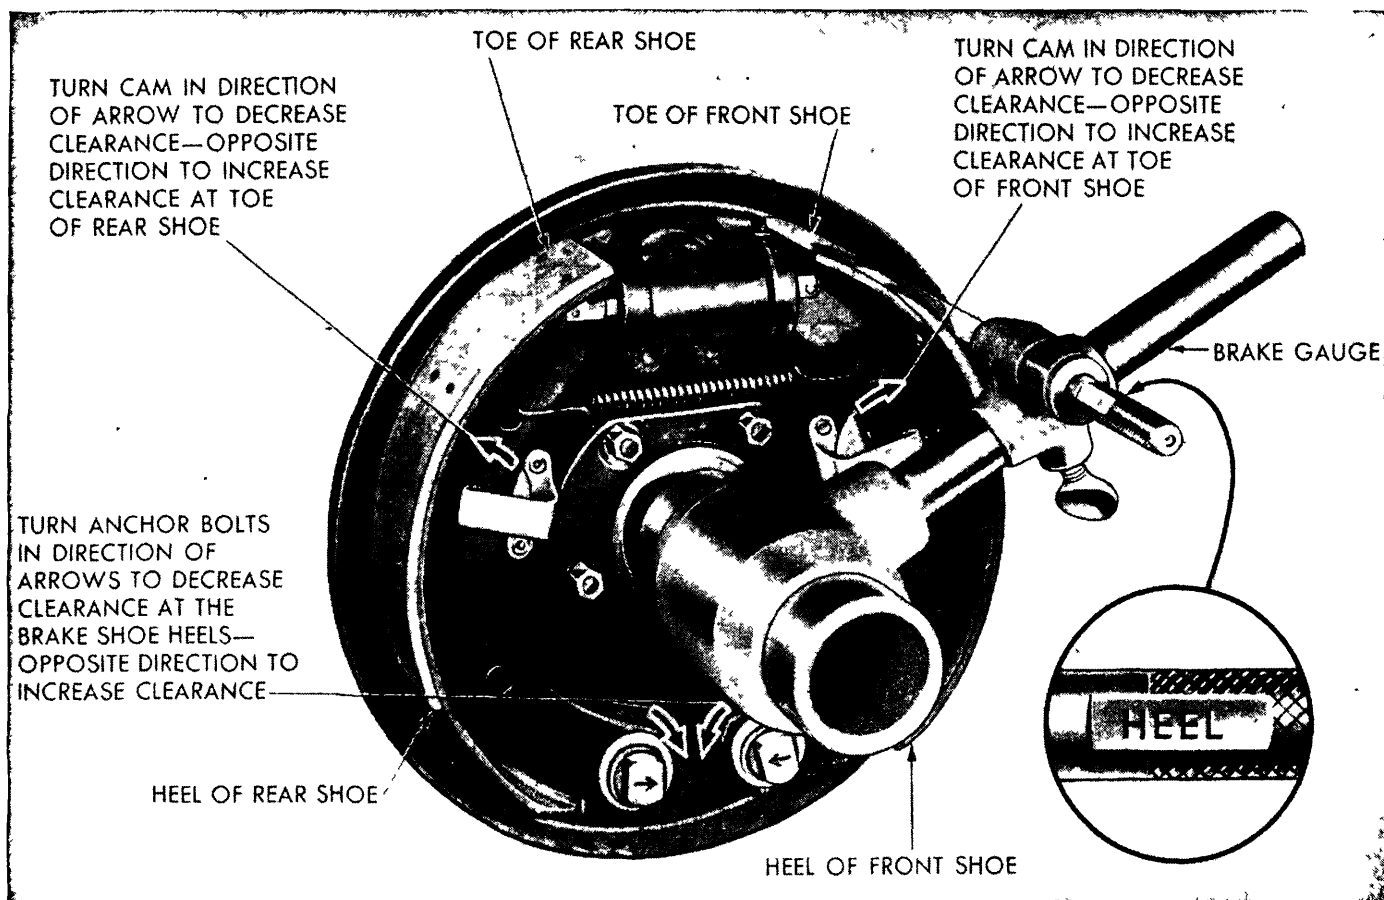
Showing brake gauge mounted on axle in position for brake adjustment
